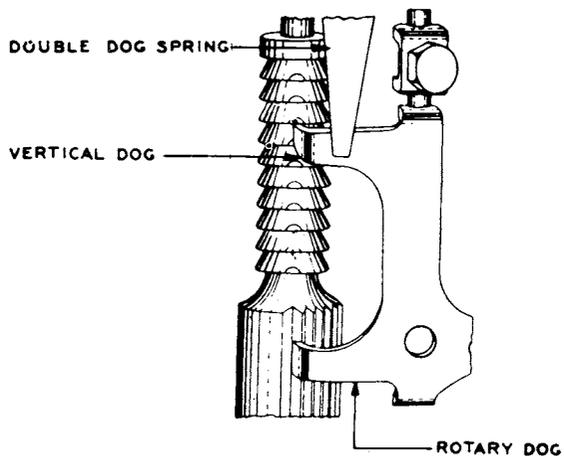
DOUBLE DOG ENGAGING RATCHET TEETH
